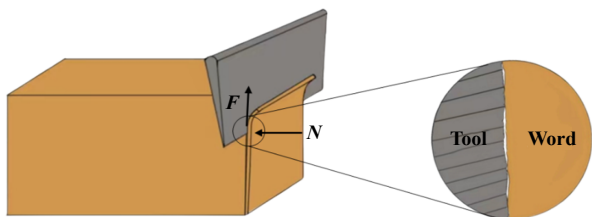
Schematic of the contact between the timber workpiece and the surface of cutting tool^[46]
